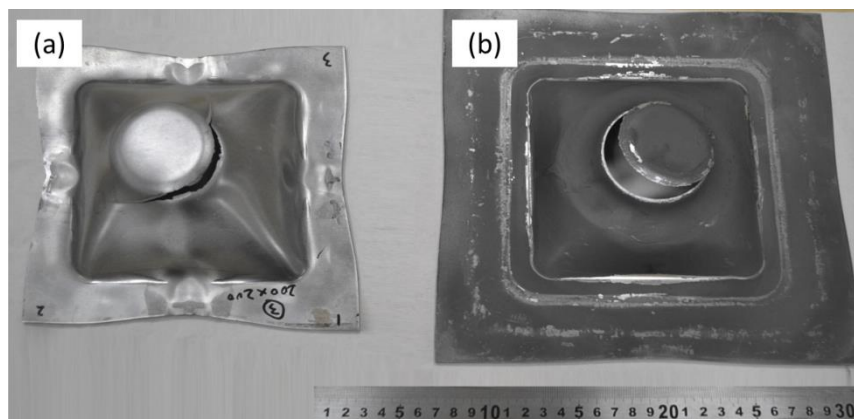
Photographs of ruptured AA5083 parts during drawing (a) at room temperature and (b) at 400°C.
